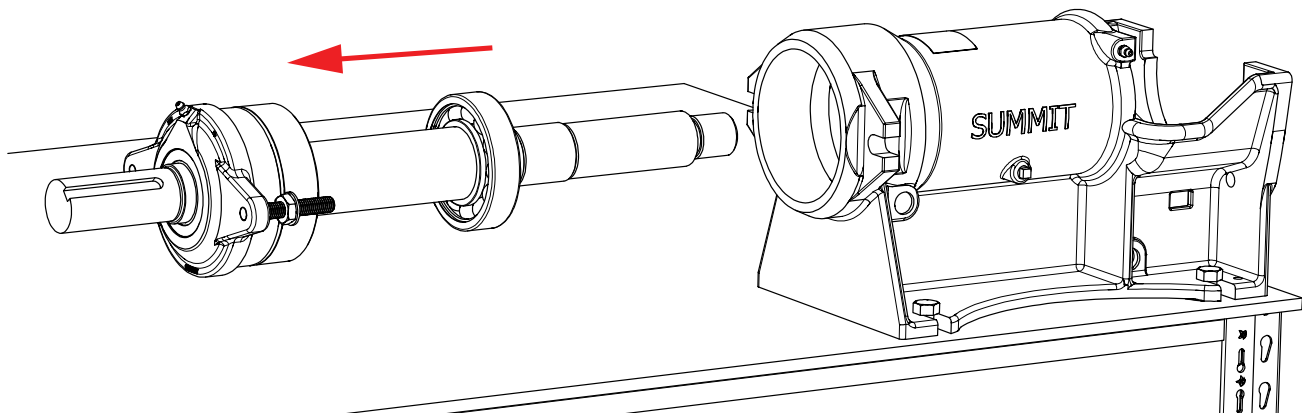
Remove Shaft Kit from bearing frame (228)
